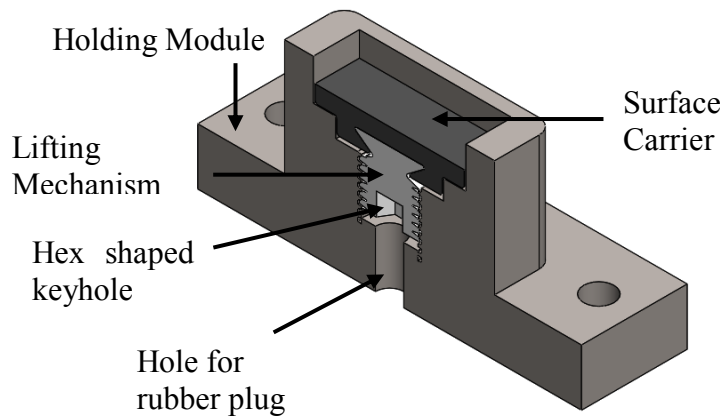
A cross sectional image of the surface holding assembly used in the channel.
